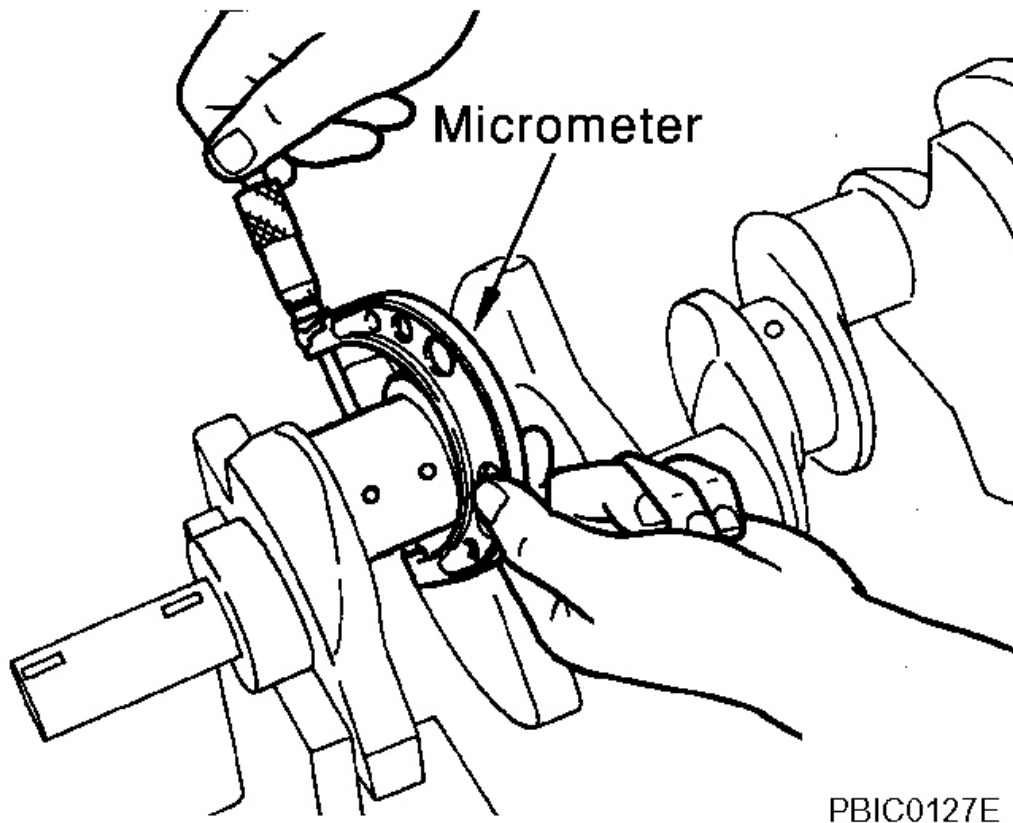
Measuring Connecting Rod Bearing Oil Clearance
